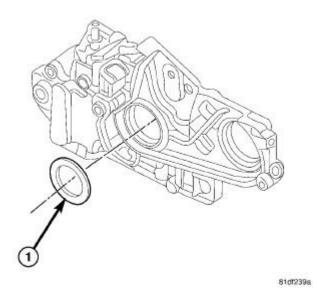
FRONT CRANKSHAFT SEAL Courtesy of CHRYSLER LLC
